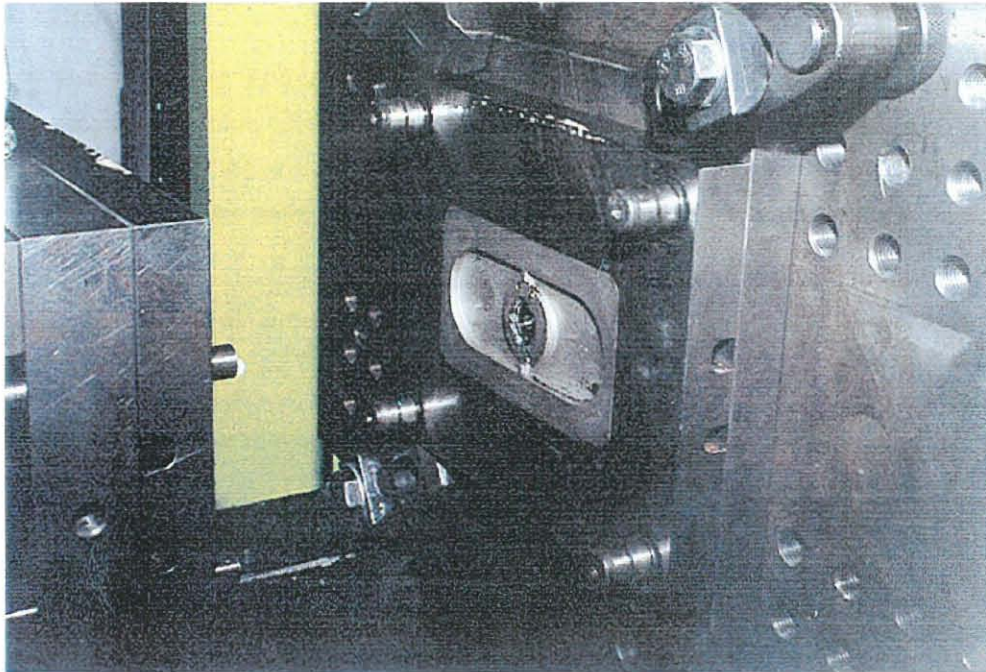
Fixed Half Insert Mounted in Injection Moulder
